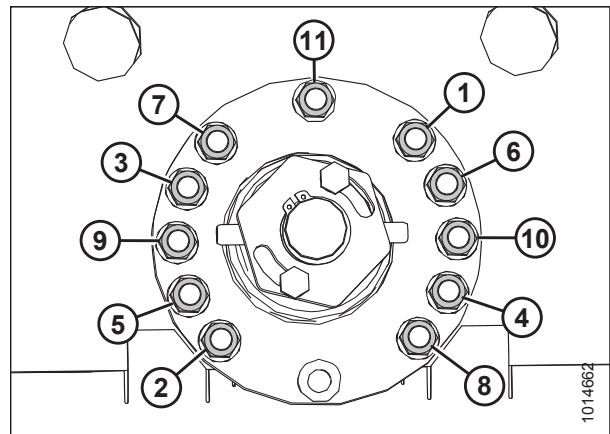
Tightening Pattern (Hub Removed for Clarity)
